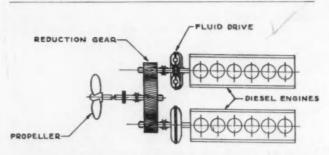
Two medium-speed diesels connected through hydraulic couplings and helical reduction gears to a propeller shaft
